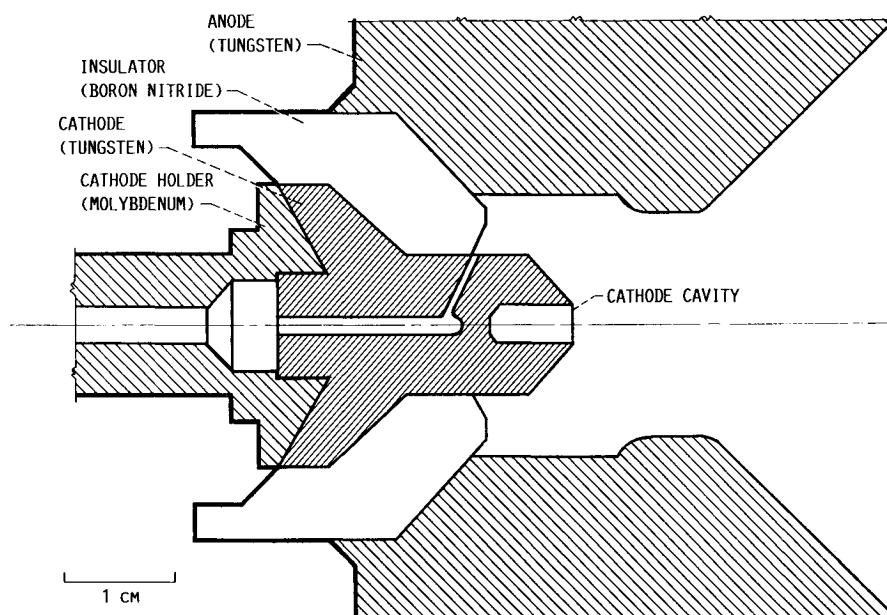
Radiation-cooled thruster electrode assembly (Ref. 7).
